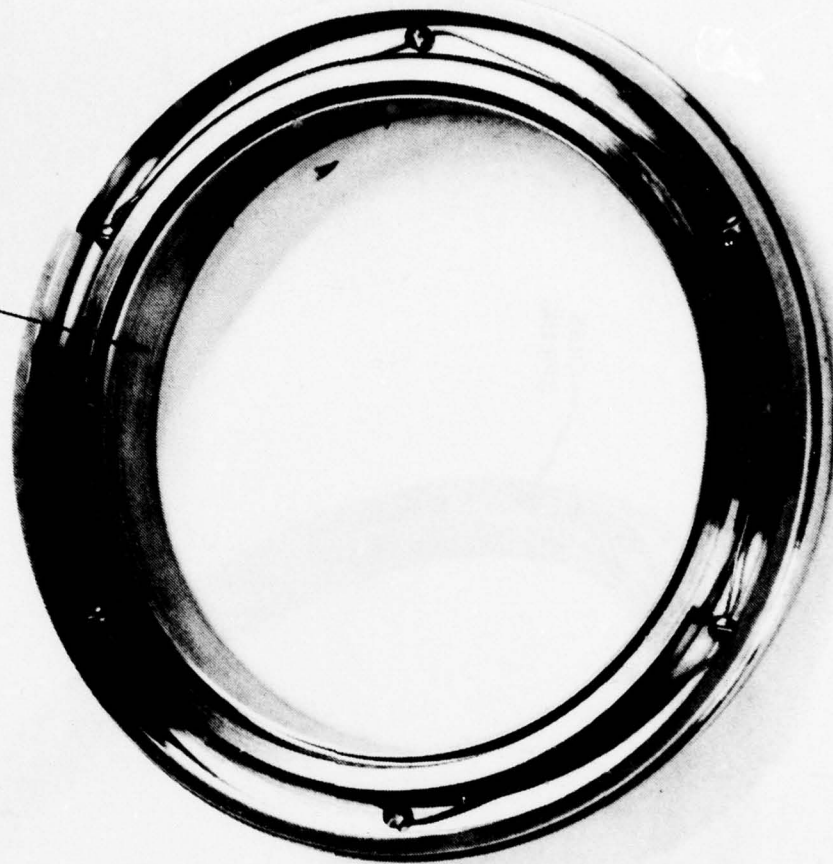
Rotary Shaft Seal Assembly, Circumferential Sealing Type
